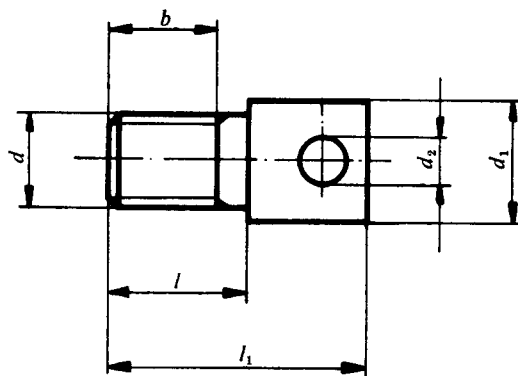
Driving bolt FIG. 7 — Vis d'entraînement Фиг. 7 — Приводной палец
